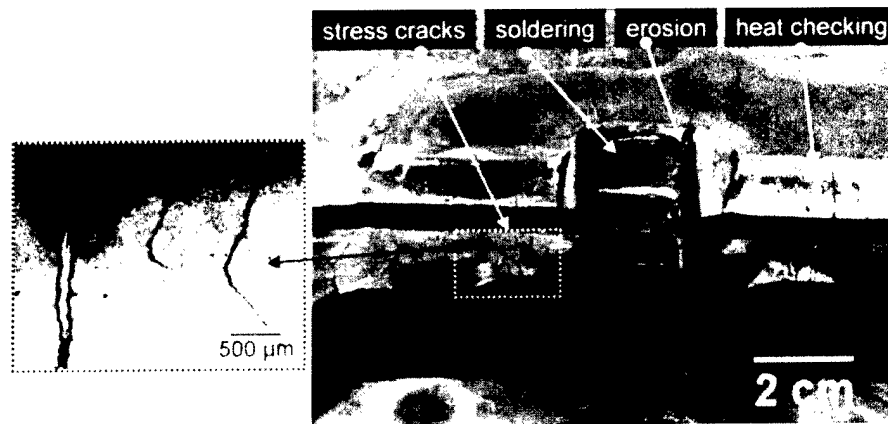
Damage mechanisms in aluminium die casting (the inset on the left shows a scanning electron microscope cross-section of the mould on the right with thermal fatigue cracks).
